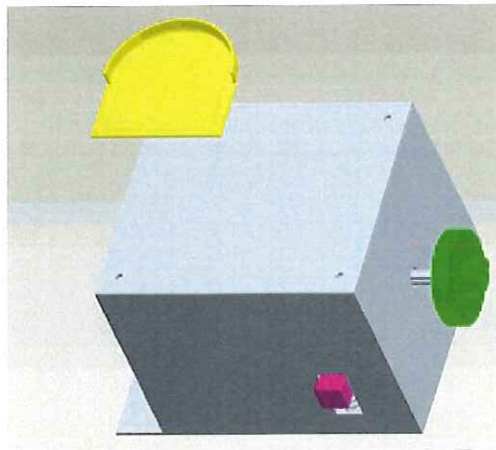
Ratchet/release mechanism used in the design to lock and release the spring.
